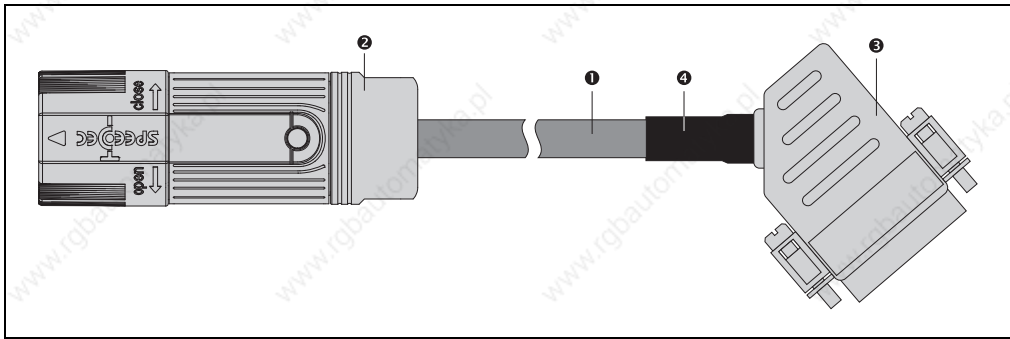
Cable schematic - Motor cable 8BCMxxxx.1523A-0
